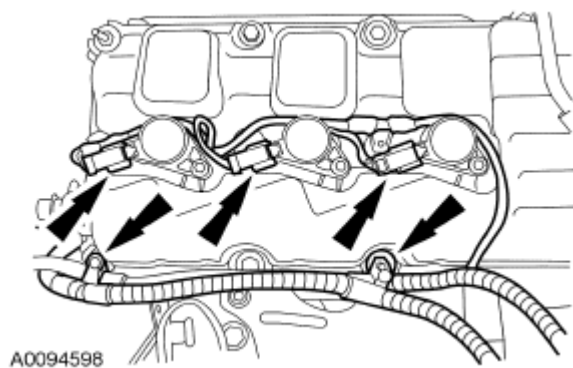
Locating Ignition Coil Electrical Connectors And Wiring Retainers
